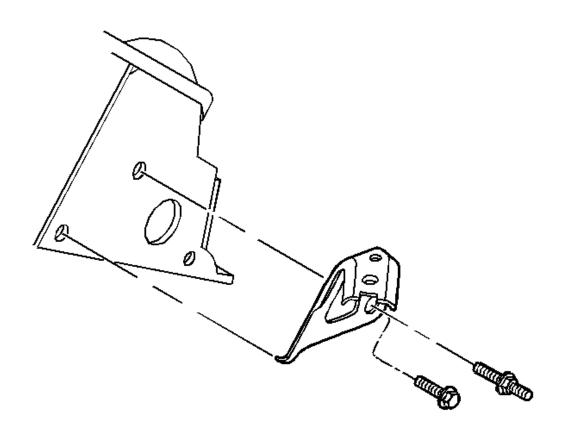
Removing/Installing Fuel Line Bracket Courtesy of GENERAL MOTORS CORP.
